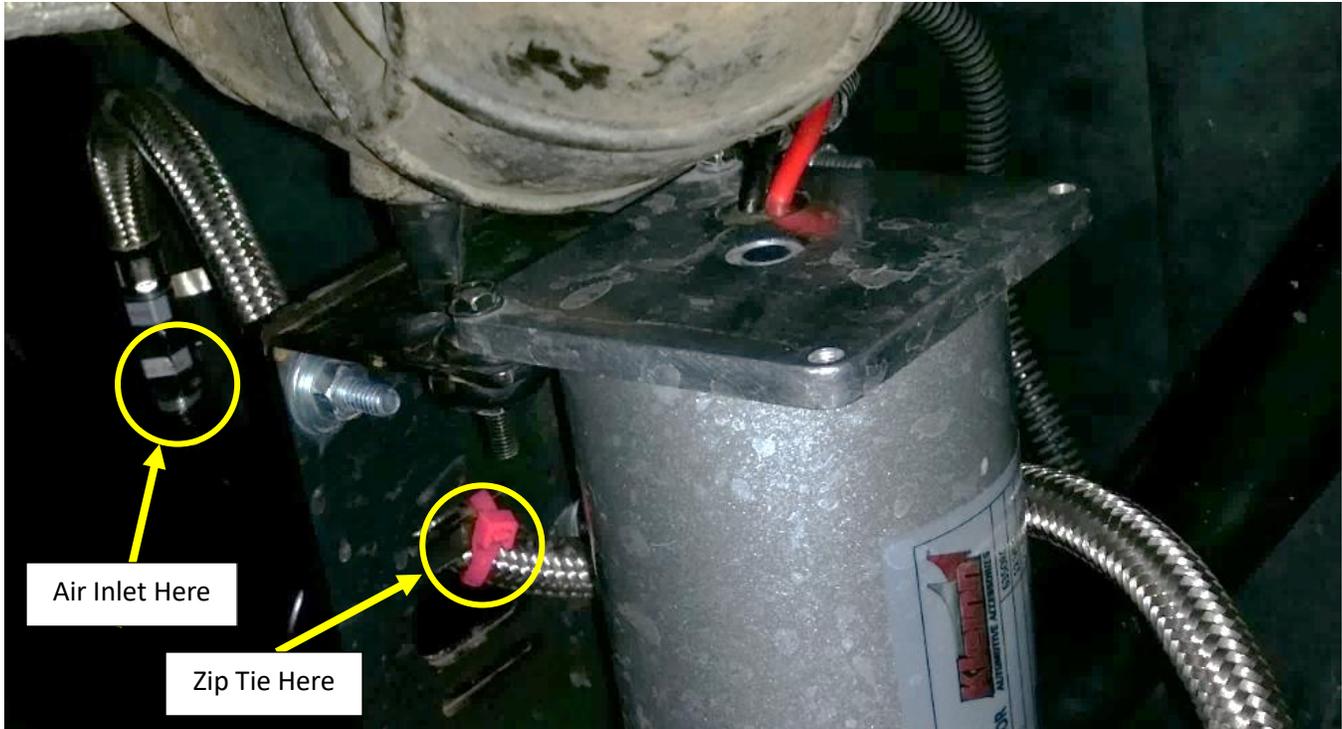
Air Compressor Final Install with Leader Hose Connection to Air Tank
